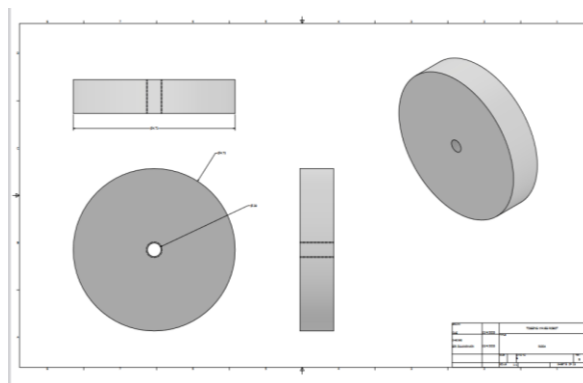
Wheel - The wheel is the reason the ring can move forward with speed like a shot.
